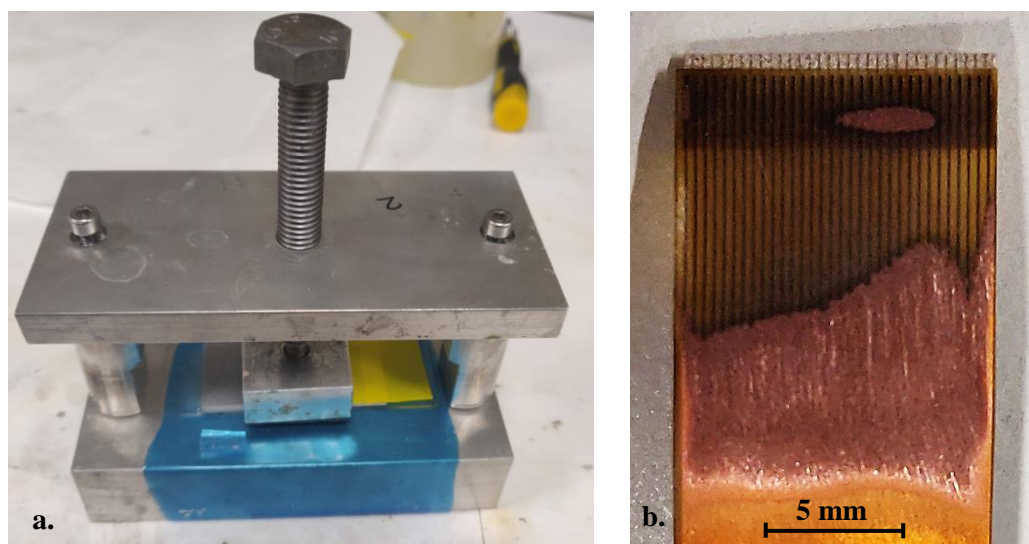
a. Press for Flexible PCB Bonding to the Array; b. Flexible PCB Bonded to the Array
